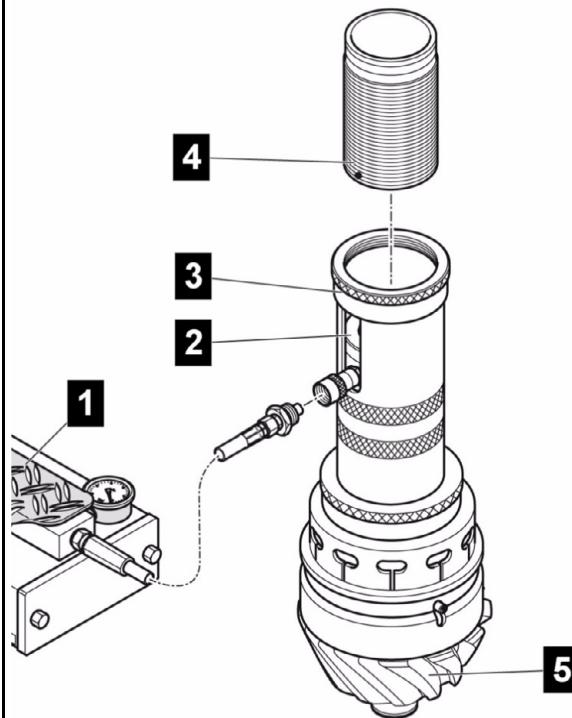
Hydraulic Bearing Puller Tool Assembly
